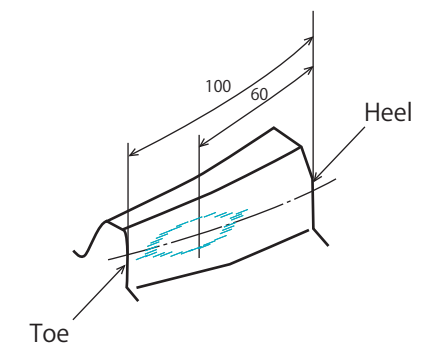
Tooth bearing for Bevel gear with Crowning.
